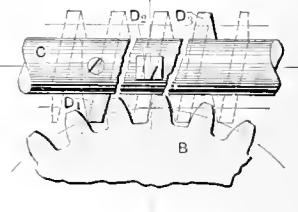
Helical Path of Fly-tool for Cutting Worm-wheel shown in Fig. 1.
